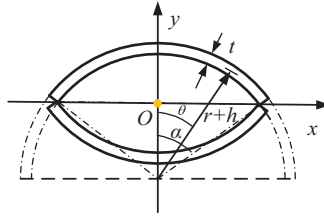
Cross-sectional geometry of the double C-shaped tape spring.
